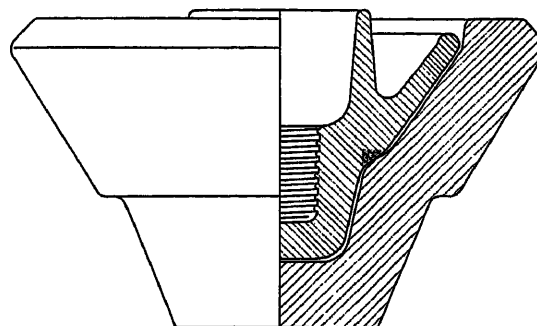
INSULATOR PART DRYING IN MOLD. SHOULDER DRIED QUICKLY BY CONTACT
